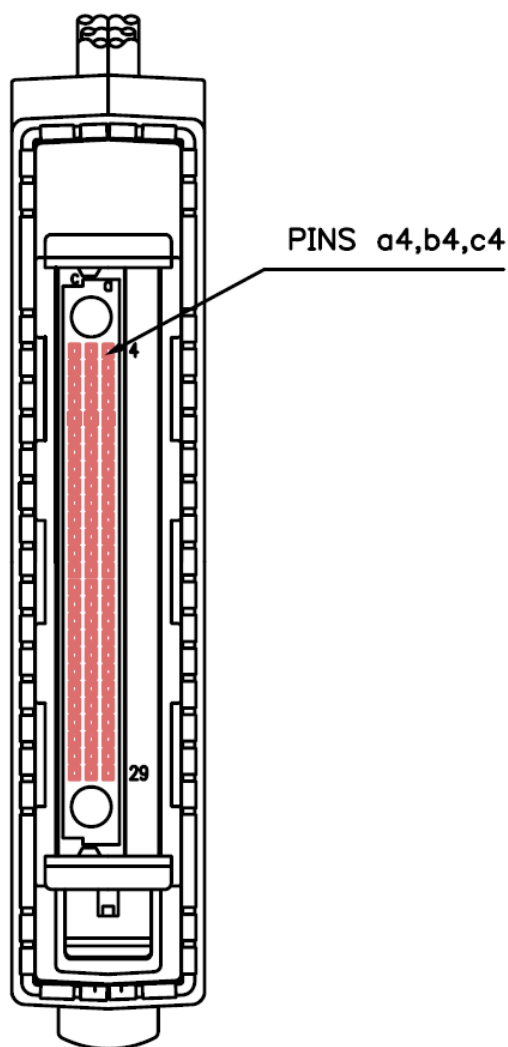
TC-305 Pin arrangement (view of outside of plug)
